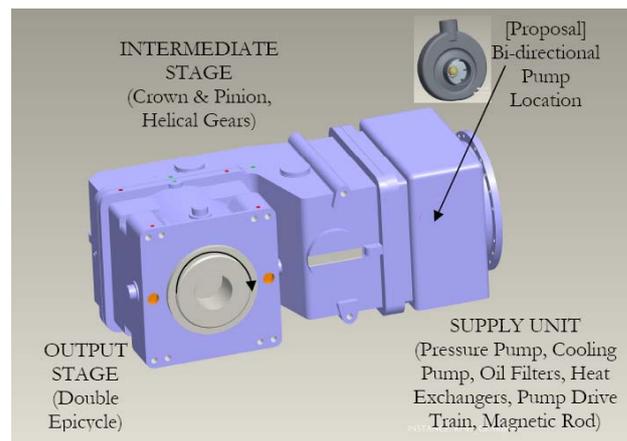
KP 45 CST Gearbox, General Assembly and Section Contents
